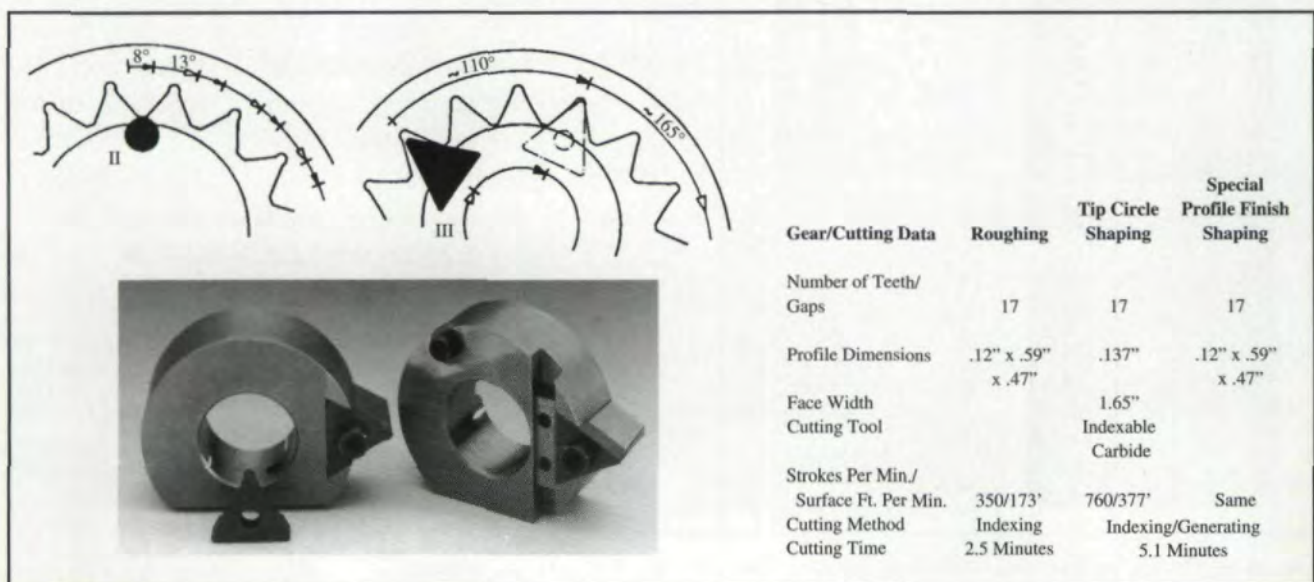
Finish-shaping the special internal profile of an oil gear by index generating.
